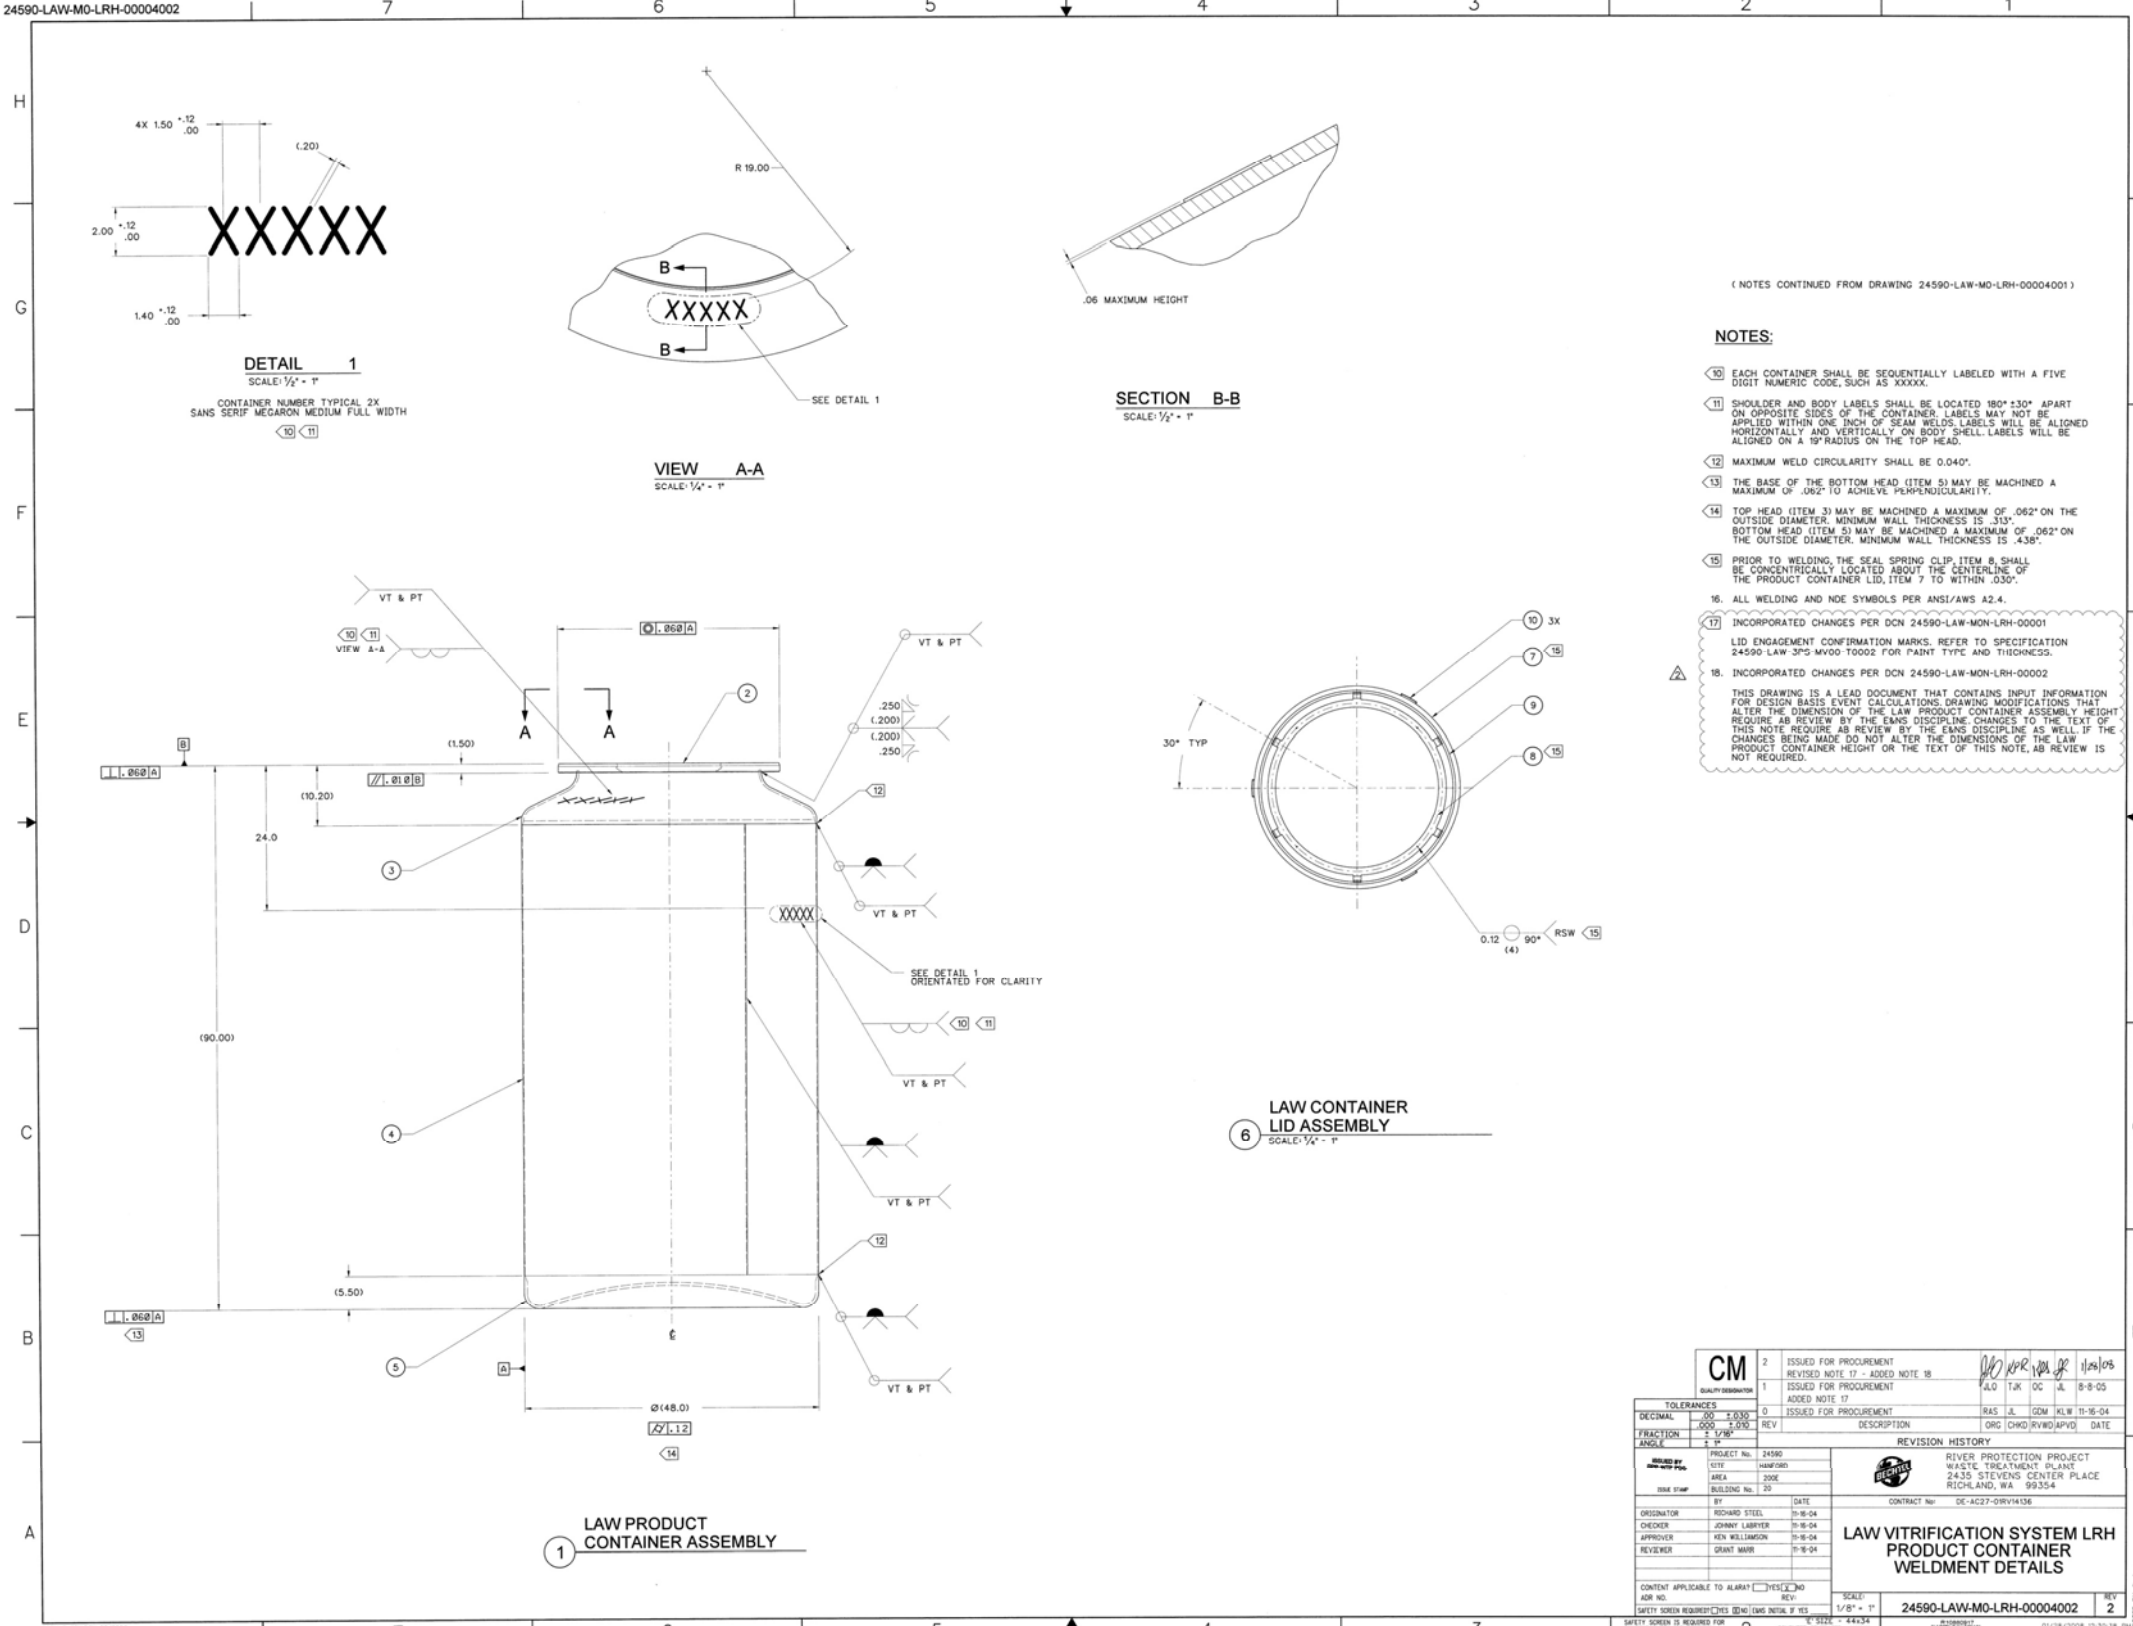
LAW Vitrification System LRH Product Container Weldment Details
